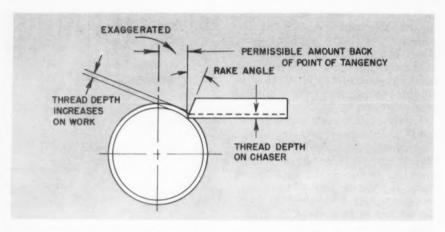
This rearward position creates an abnormality in thread form by cutting too deep.
